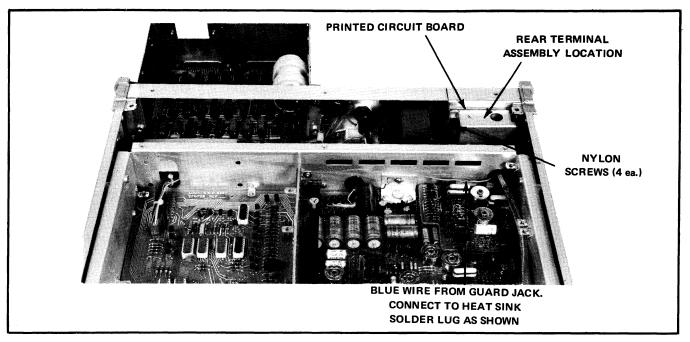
REAR TERMINAL BOARD INSTALLATION
